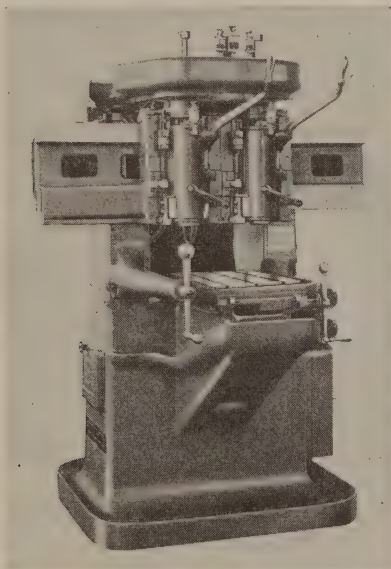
Profiling machine. (Courtesy of Pratt & Whitney Company.)
